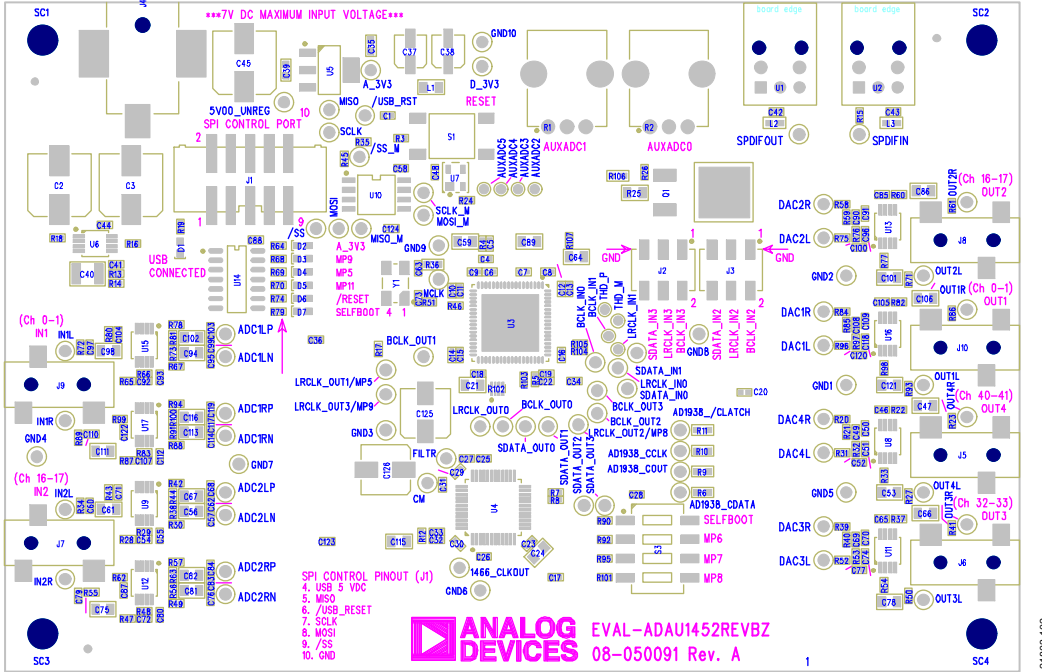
EVAL-ADAU1452REVBZ Layout, Top Assembly
